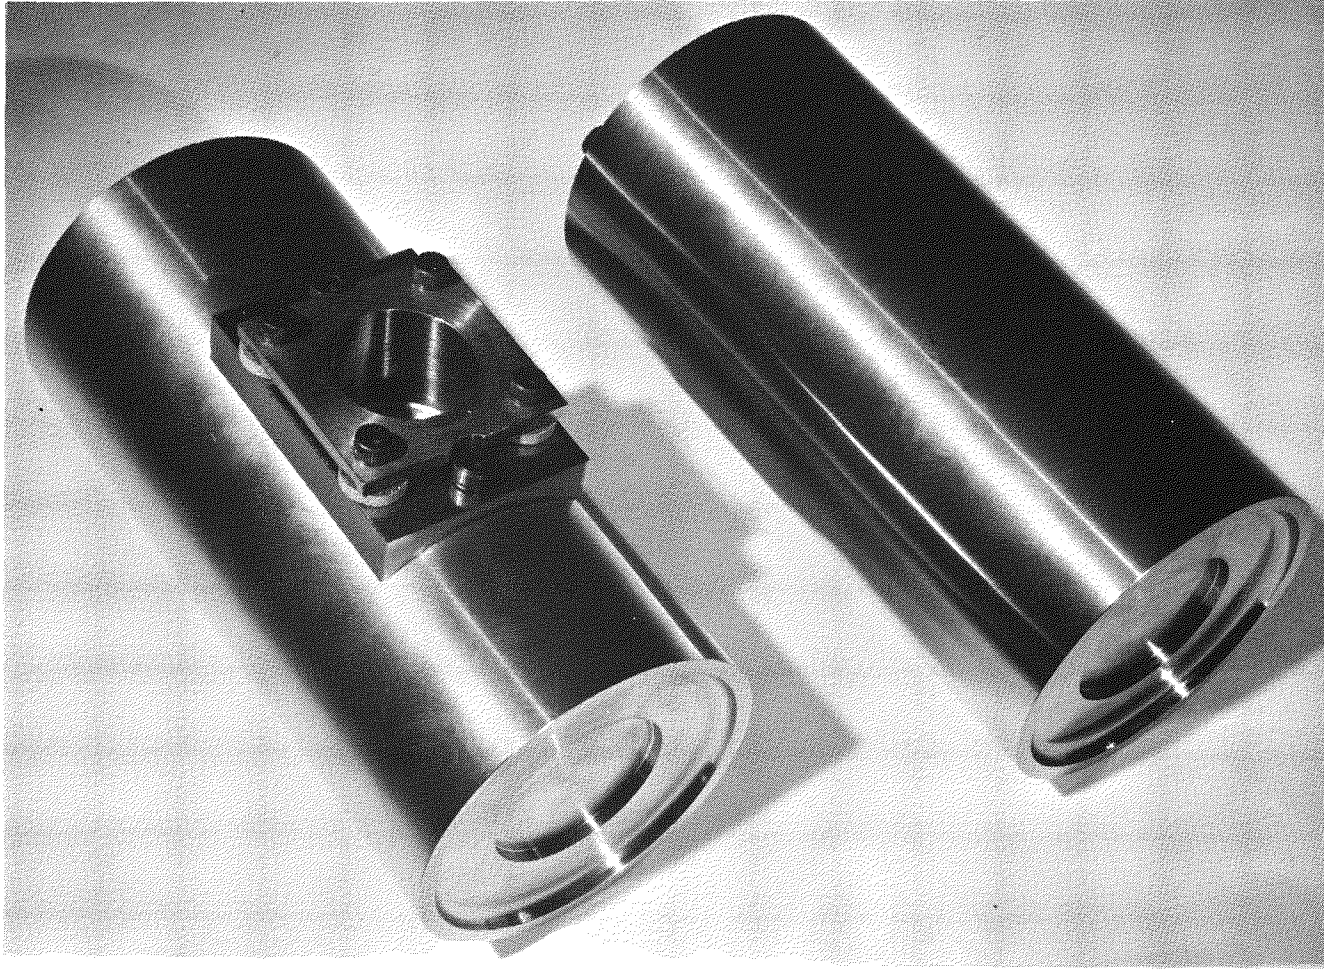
FULL-SCALE WIND TUNNEL MODELS OF SNAP 19 CAPSULE
